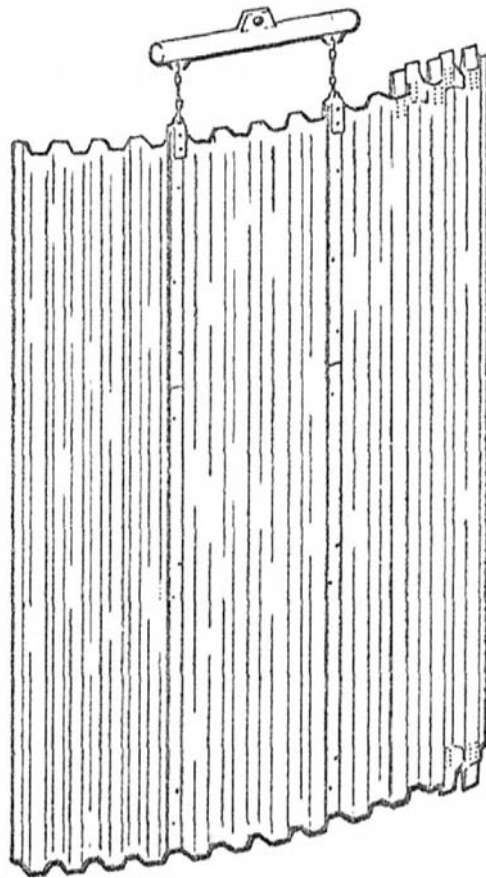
Intertank Skin Section Assembly Hoisting Tool RT-370-7296
